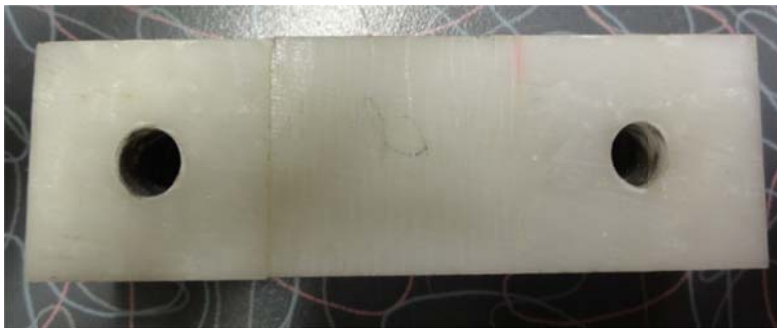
Completed Out-of-Plane Poisson Specimen
